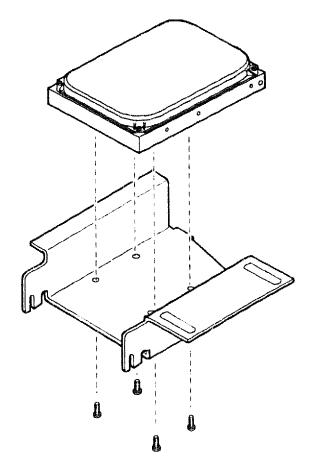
Removing the 2.5-Inch Hard Disk Drive
